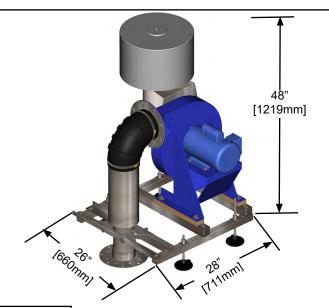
F4 Ventilation Blower (Steel roof mount configuration shown.)
